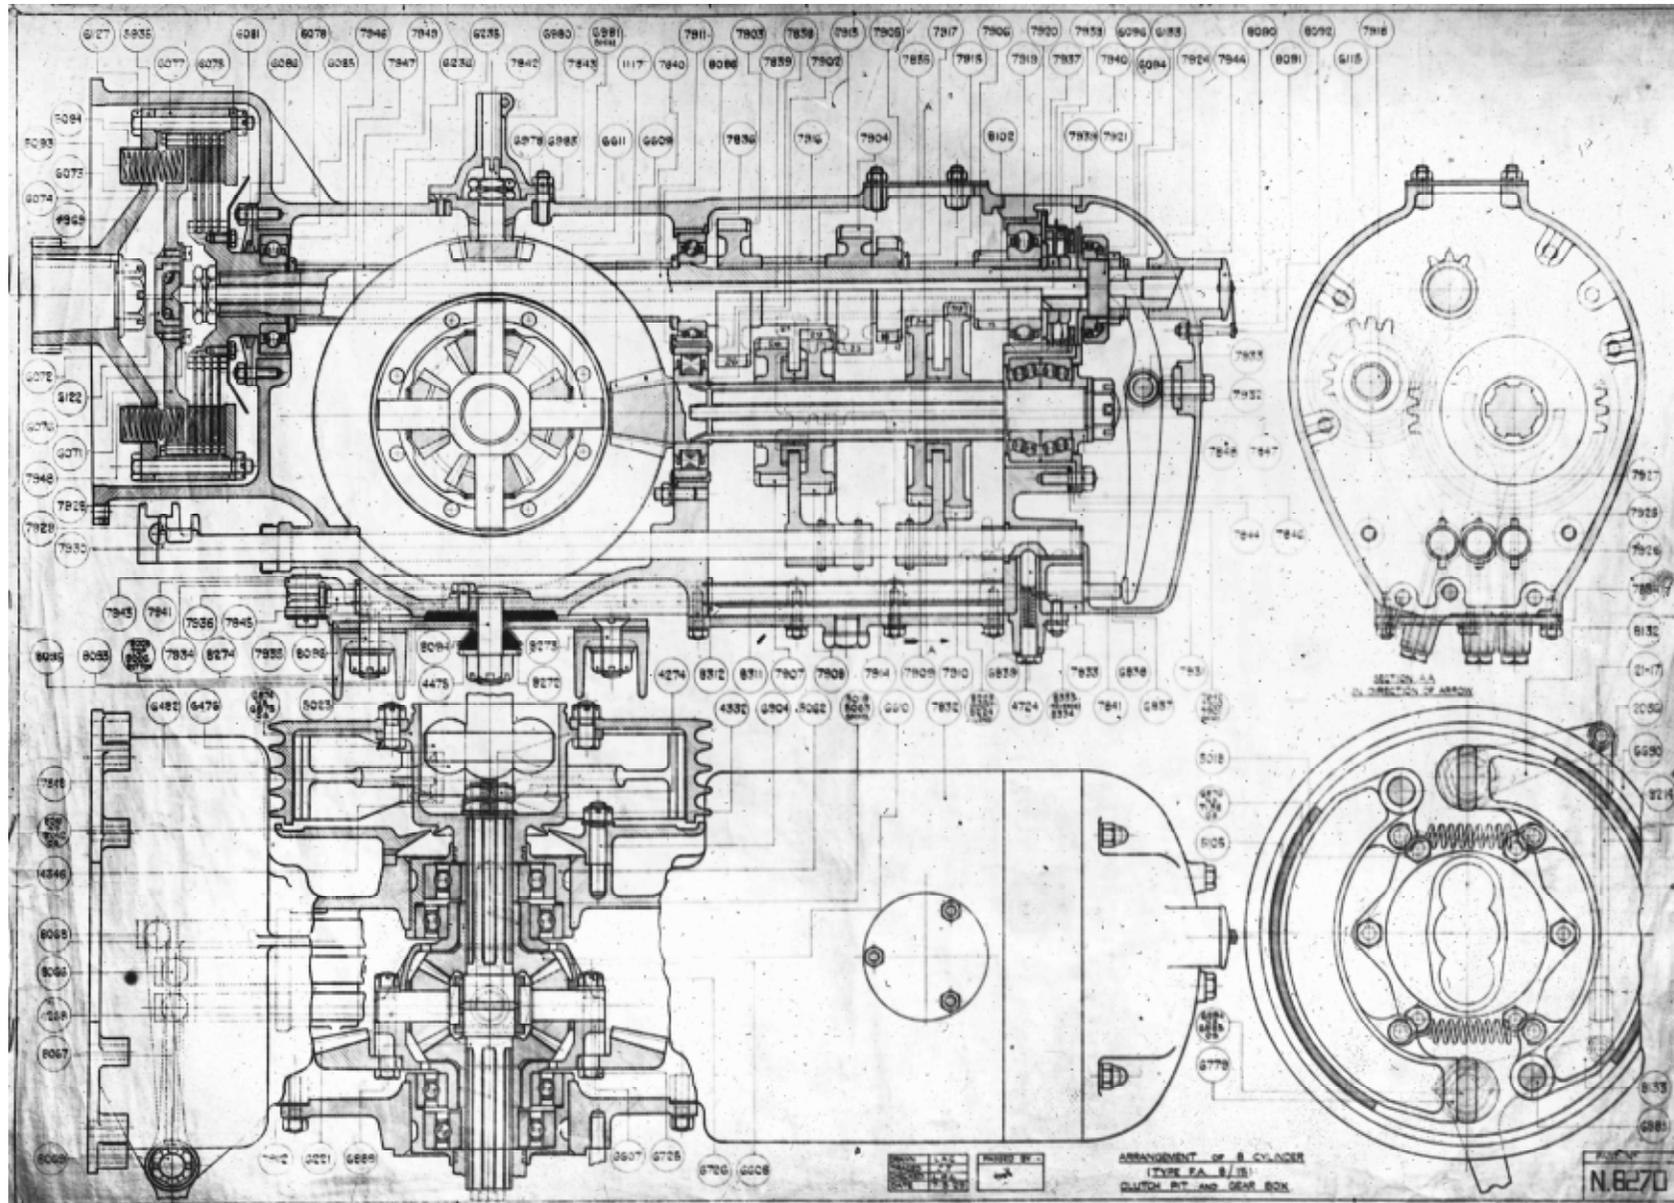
1929-30 Eight Cylinder FWD Transmission Unit. Note engine drive line through multi-plate clutch to top left is above the axis of the transverse axle.
